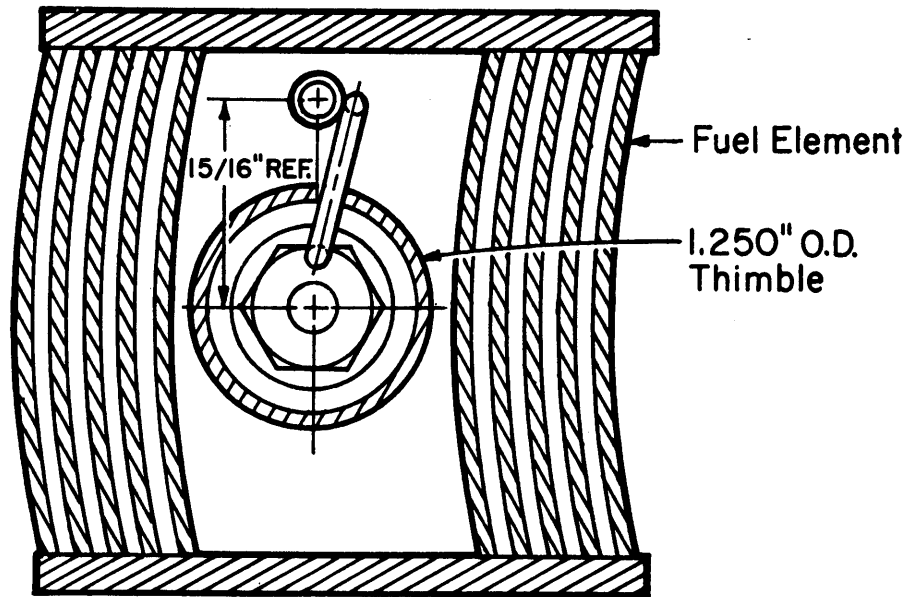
DRAWING OF FUEL ELEMENT CROSS SECTION WITH POSITION OF IN-PILE SECTION SHOWN
